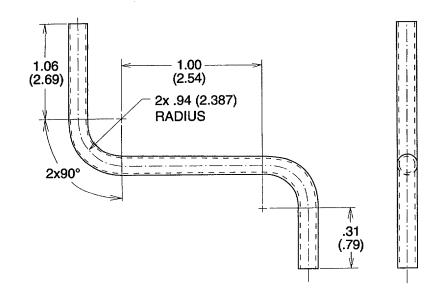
Tube, Expansion Valve Bypass, Part Number 148K0171
